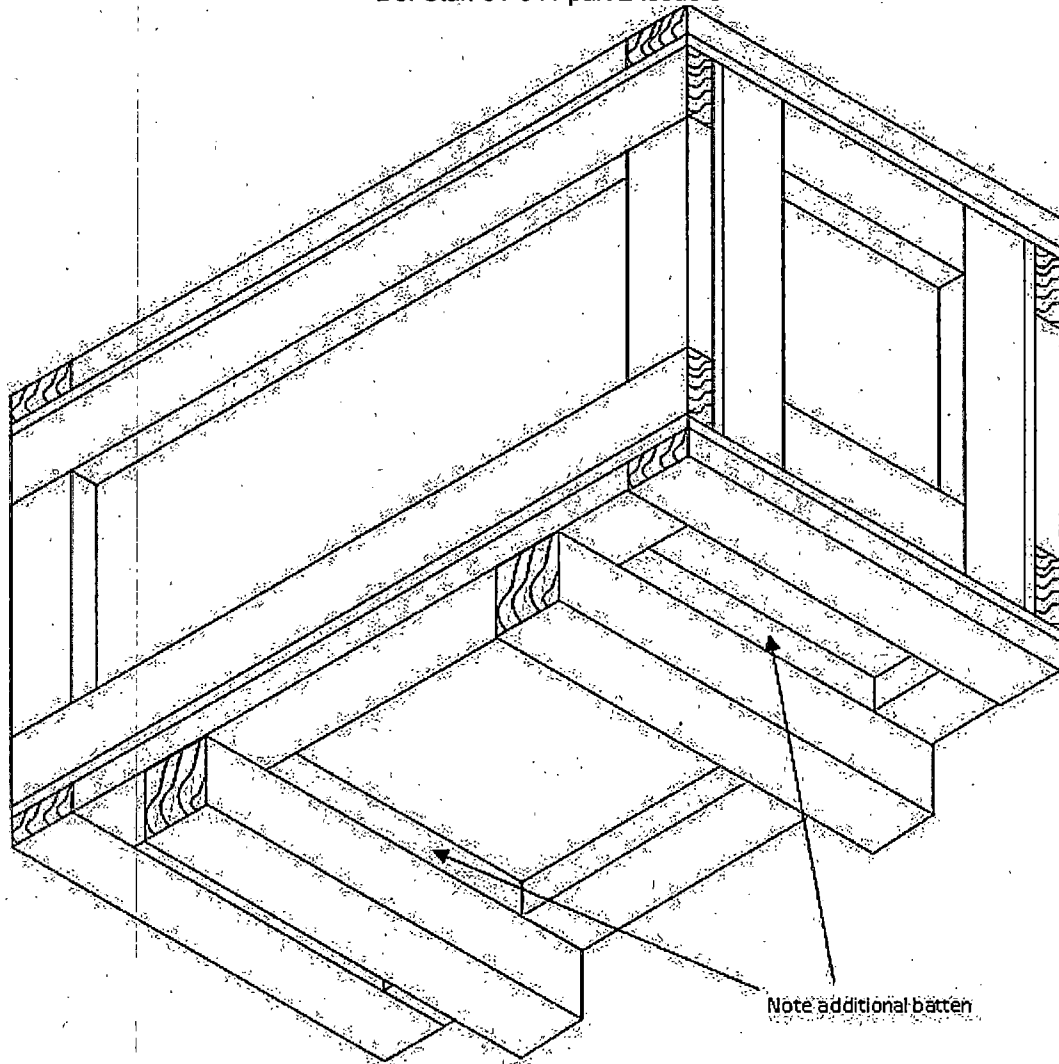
Battened Plywood Case Fitted with Fork-lift Battens
